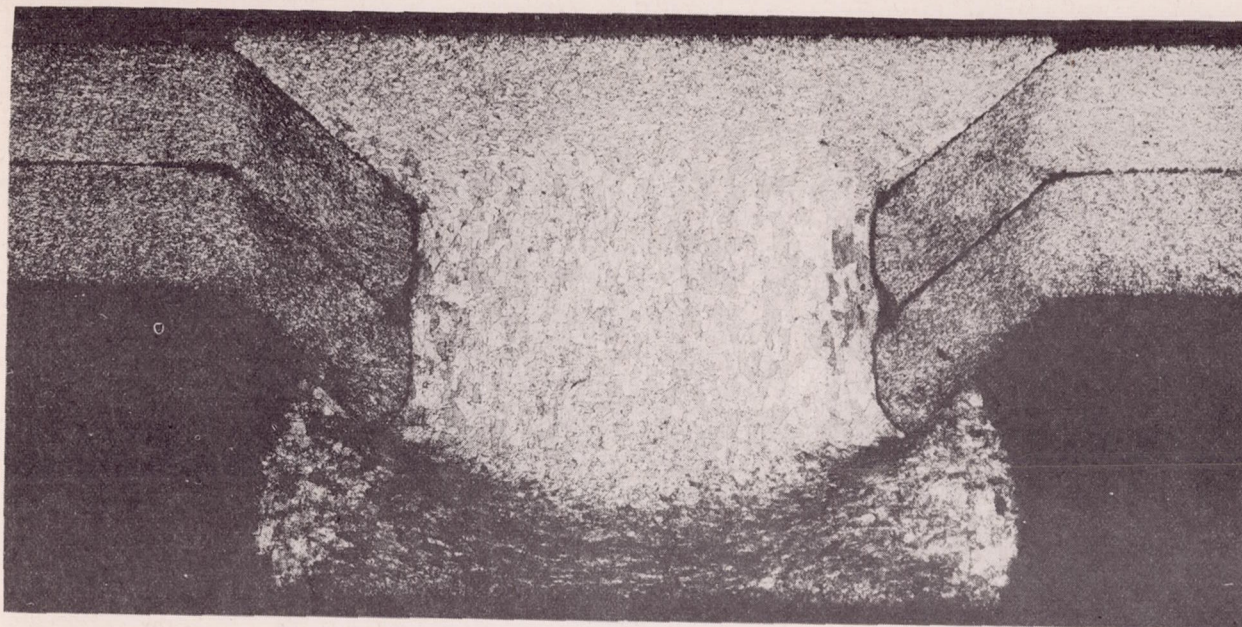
Set of dimples produced in 0.032-inch 24S-T sheet with maximum die diameter 3.5 percent less than the maximum punch diameter. Dimples produced with 5000-pound pressure in sheet drilled with an 0.1100-inch diameter No. 35 drill. Magnified 20 times.
